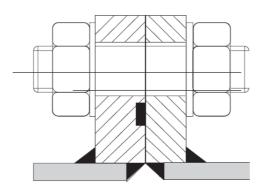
RING TYPE JOINT USING MATCHED O-RING TYPE FLANGES – STEEL SHOWN
